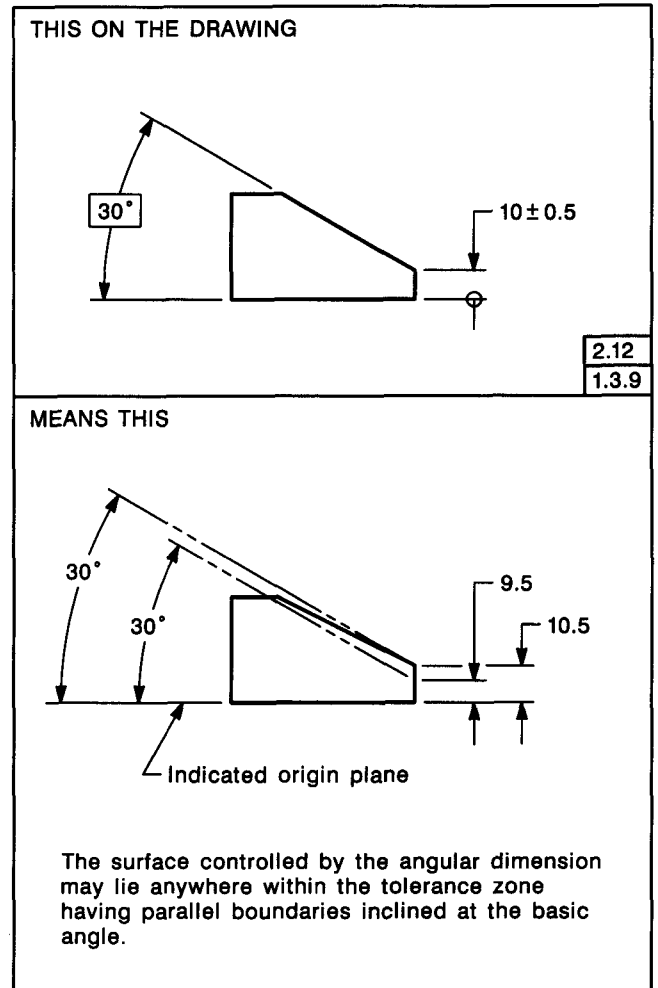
TOLERANCING AN ANGULAR SURFACE WITH A BASIC ANGLE
